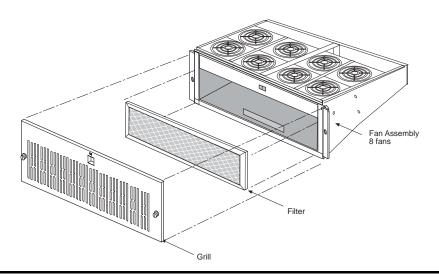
Attach Fan Assembly to Front of Frame Rail
